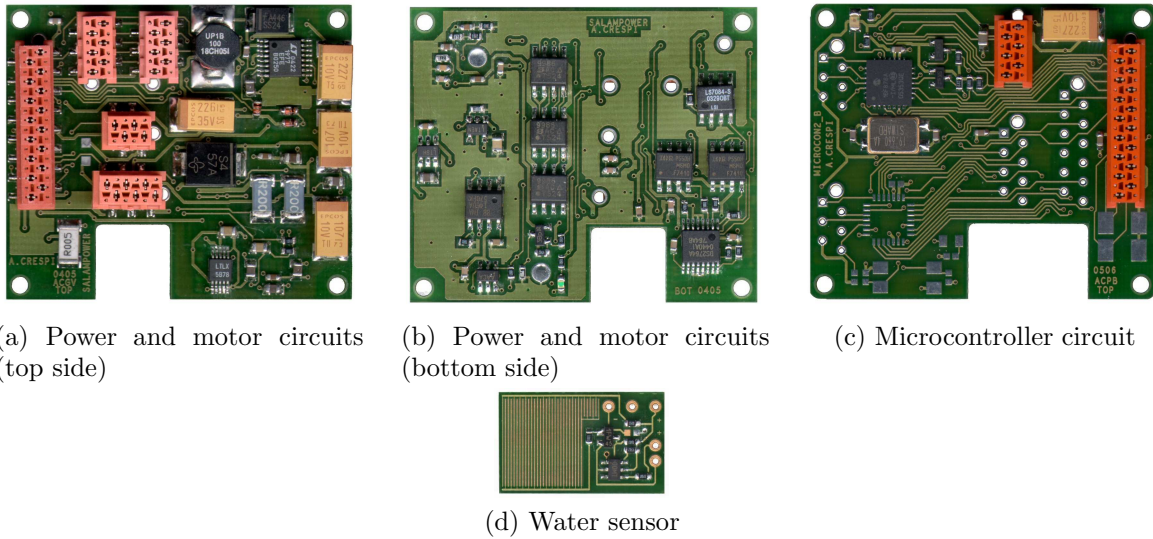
Pictures of the printed circuit boards of the robot (real size).
